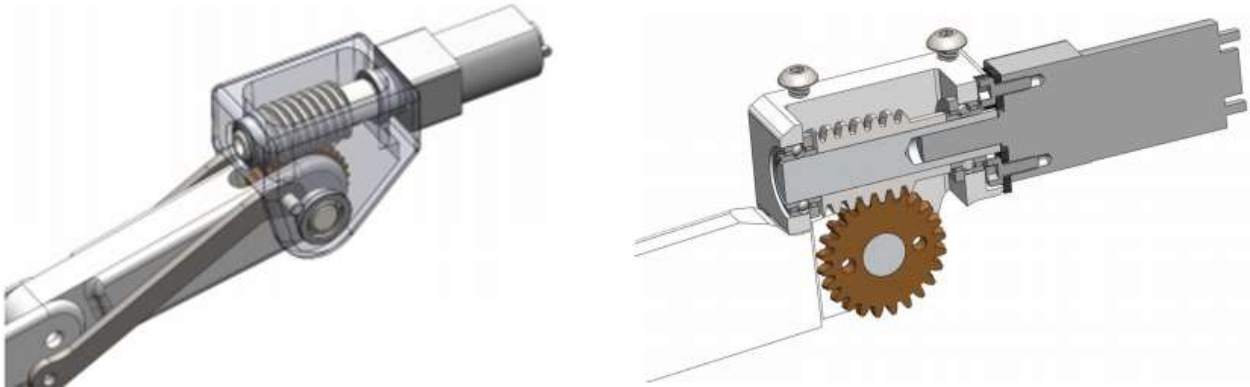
(Left) Worm gear knuckle design and (right) cross sectional view of knuckle design.
